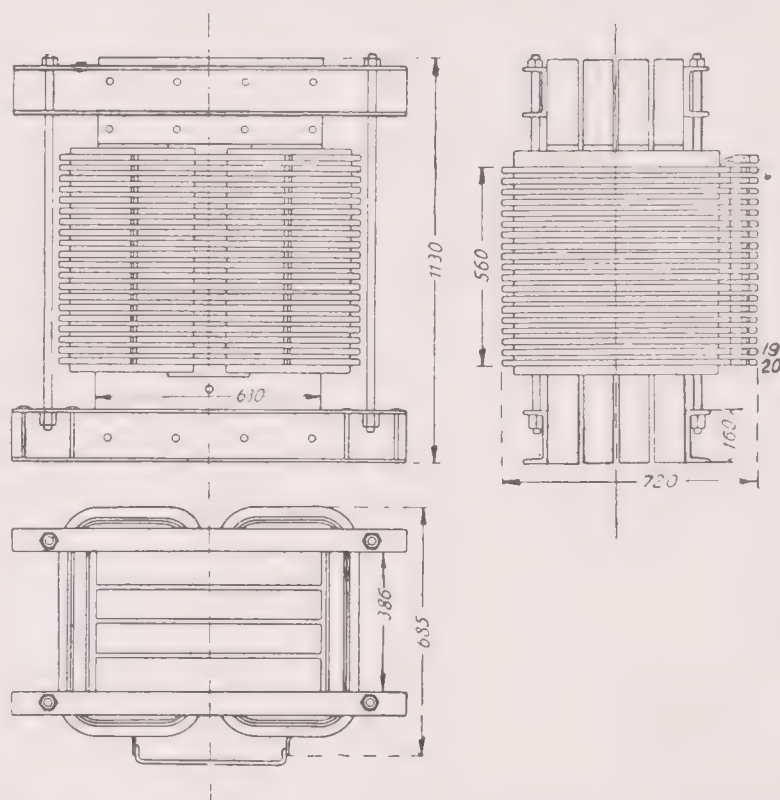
OUTLINE DRAWINGS OF 200 KILOVOLT AMPERE AIR BLAST TRANSFORMER OF WHICH TWO ARE INSTALLED ON THE OERLIKON 15,000 VOLT, 15-CYCLE LOCOMOTIVE WITH SINGLE-PHASE COMMUTATOR MOTORS (DIMENSIONS IN MILLIMETERS).
